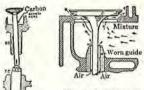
(left). Exaggerated view of a worn valve-stem guide (SG) and valve-tappet guide (TG) wear in an L-head valve-engine. The same applies to an overhead valve-engine.
